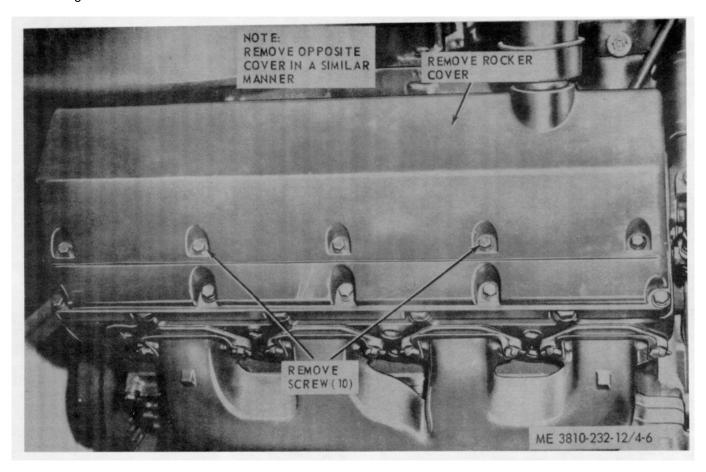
Carrier engine rocker arm cover, removal and installation
